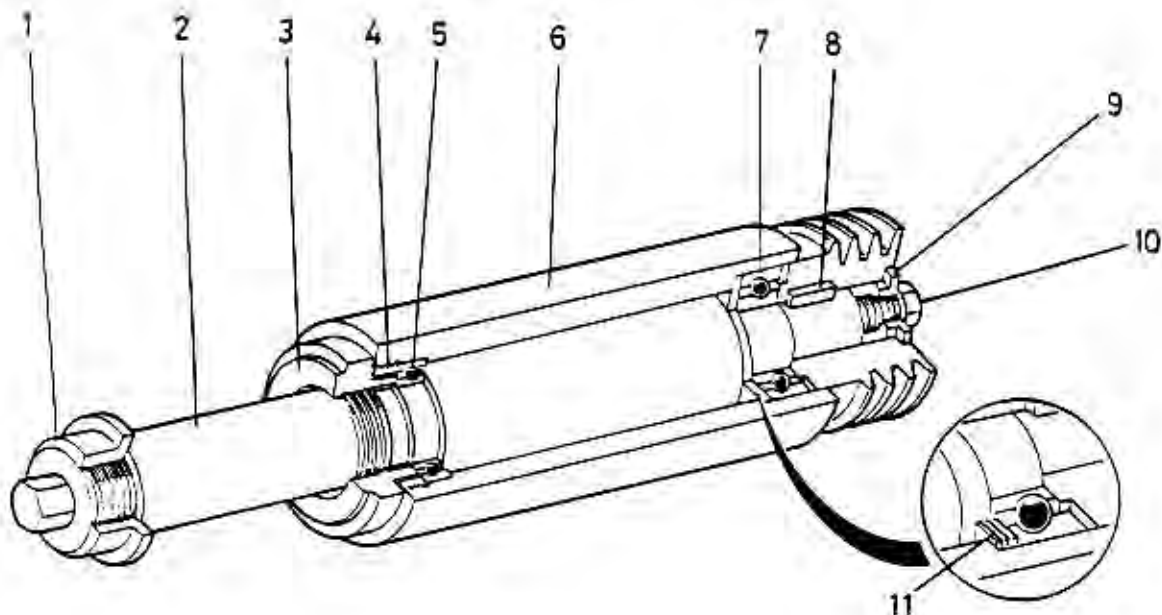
BOTTOM HEAD SPINDLE UNIT - 40MM DIAMETER SQUARE SHOULDER
